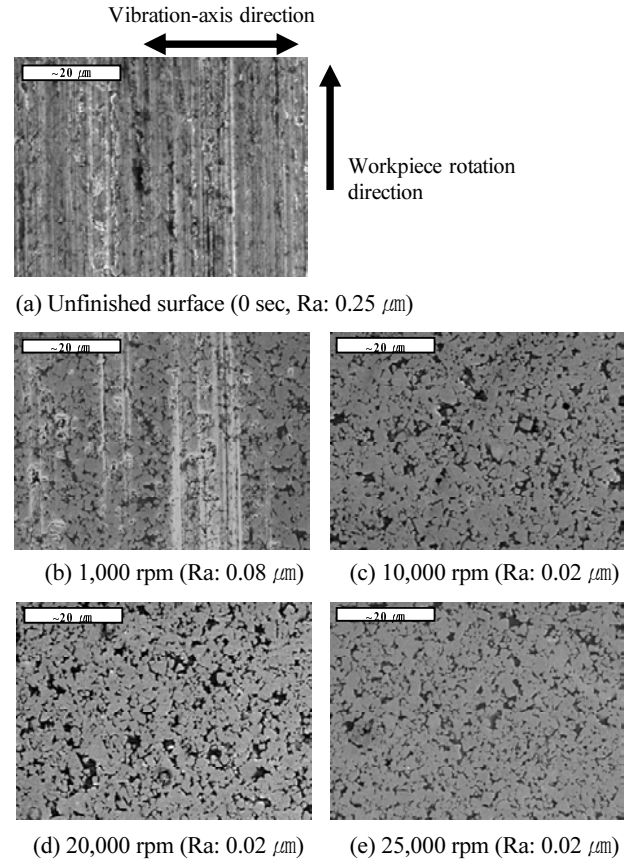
Photos of workpiece surface before and after magnetic machining (case a: 0 sec, case b, c, d: 160 sec)
